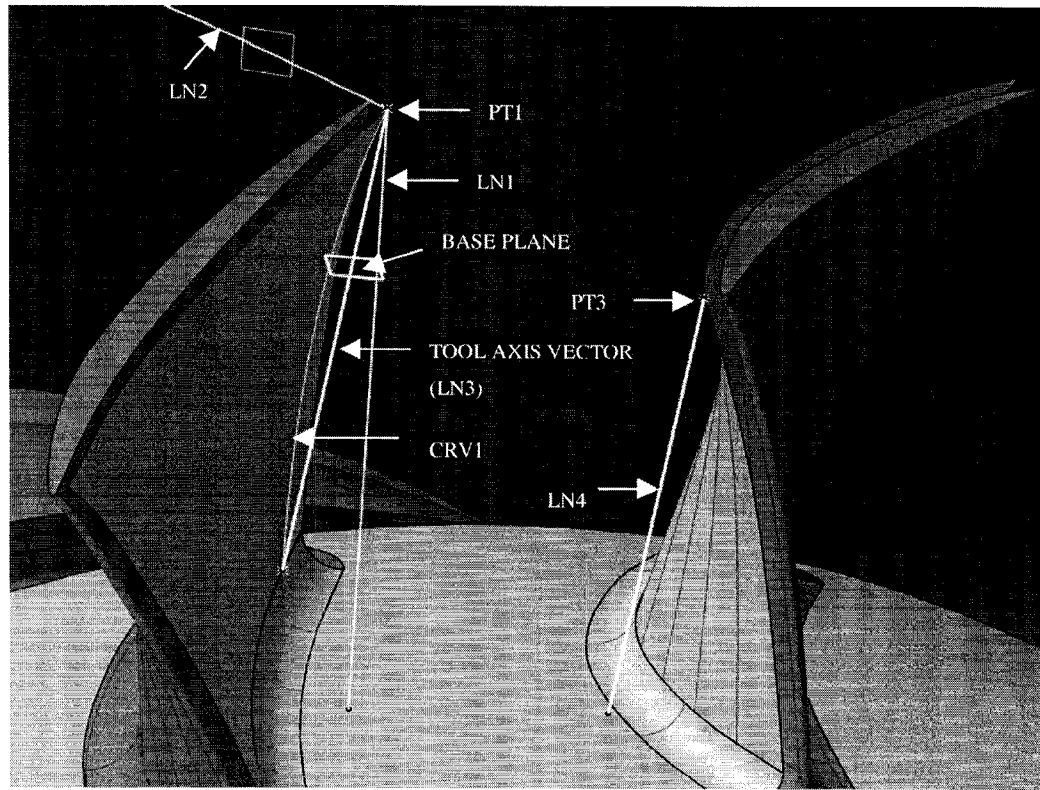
Tool axis orientation for machining one slot of the IBR part
